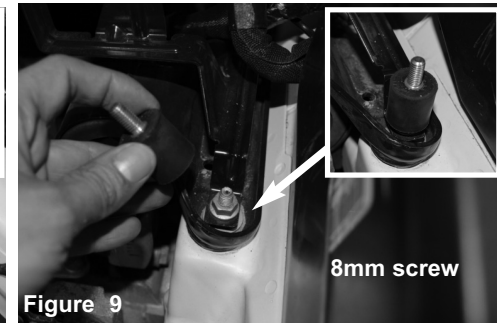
Install the male/female vibramount to the threaded fitting on the frame of vehicle. Secure and tighten.
